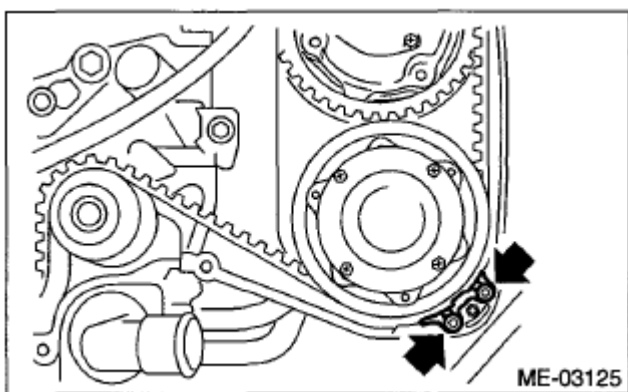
Locating Timing Belt Guide Mounting Bolts (3 Of 4)
